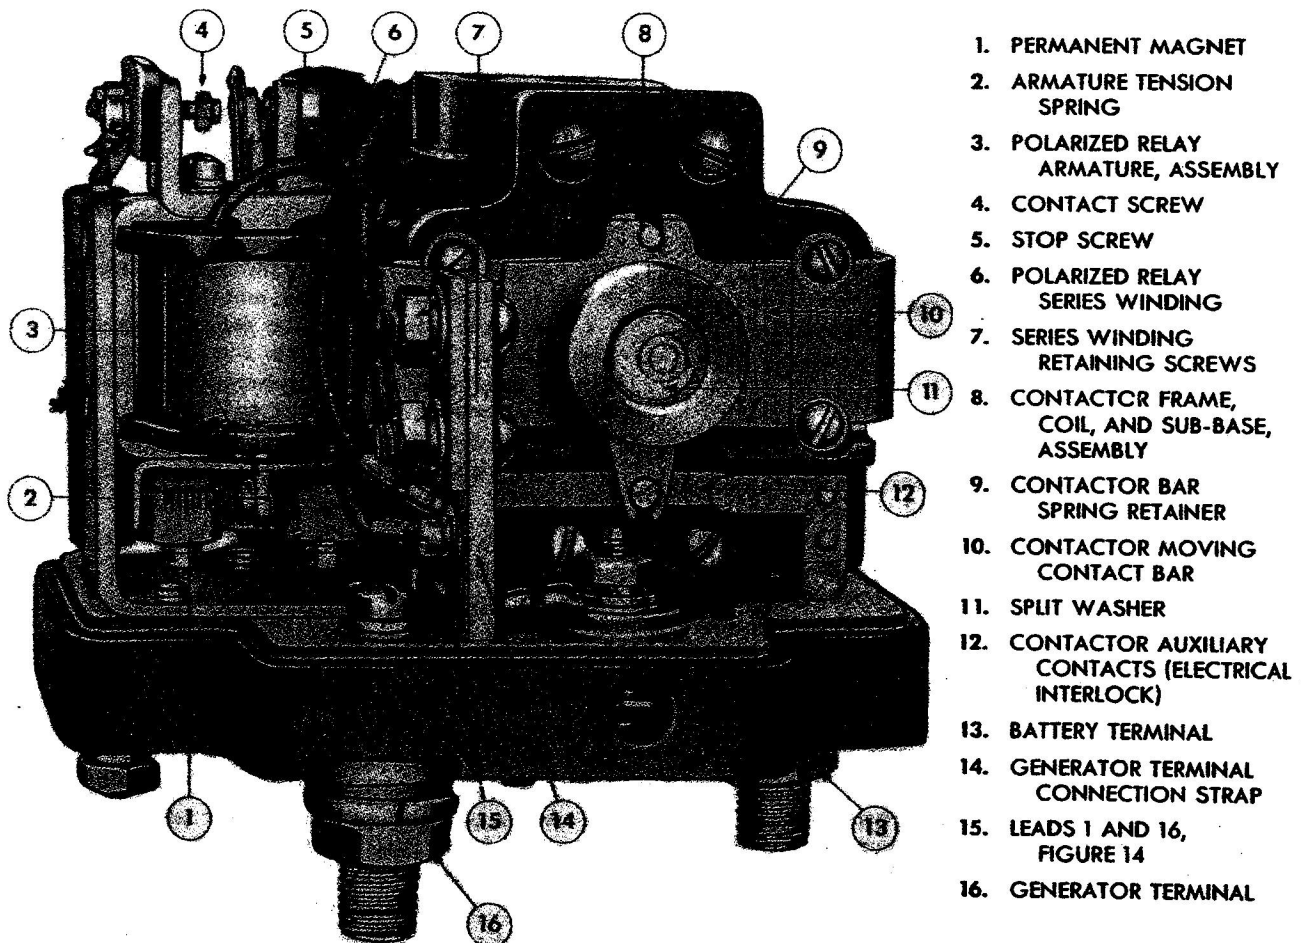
Polarized Relay and Magnetic Contactor Assemblies
